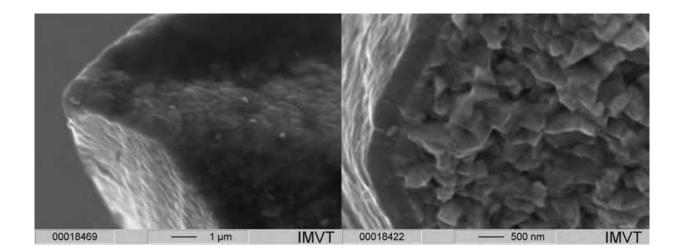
Coated cutting edge of a 30  $\mu$ m end mill by Hitachi. Right: Cross section illustration coating thickness and hard metal microstructure.
